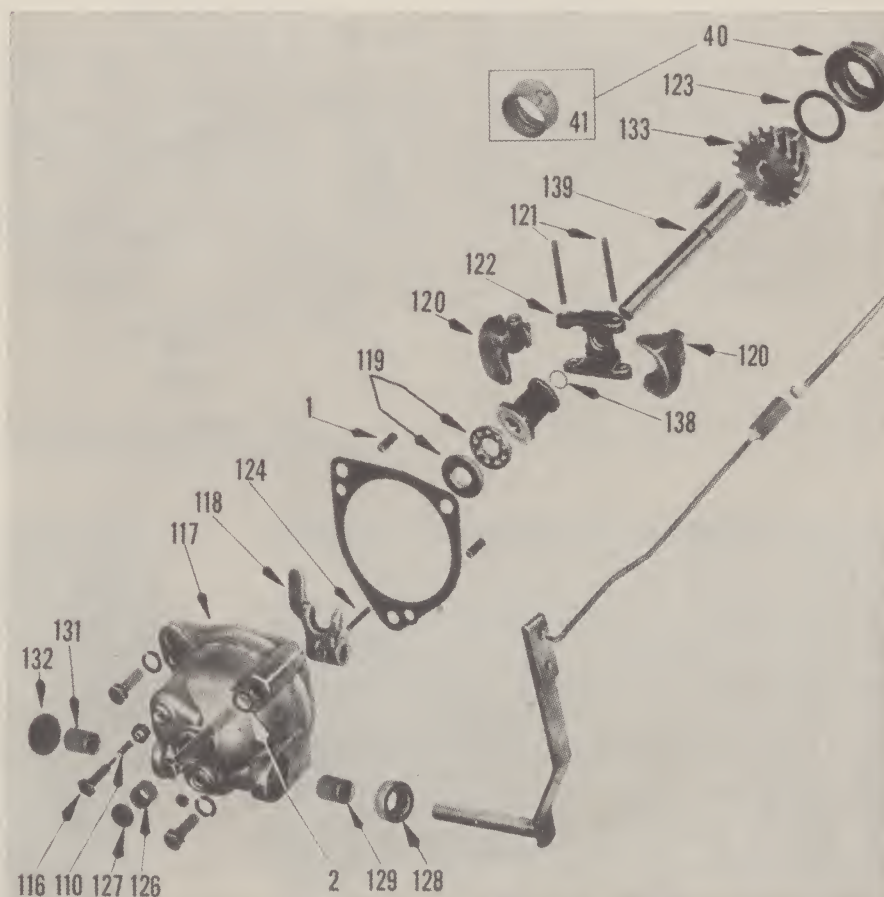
A—Exploded view of speed governor. Refer also to Fig. 0496.
